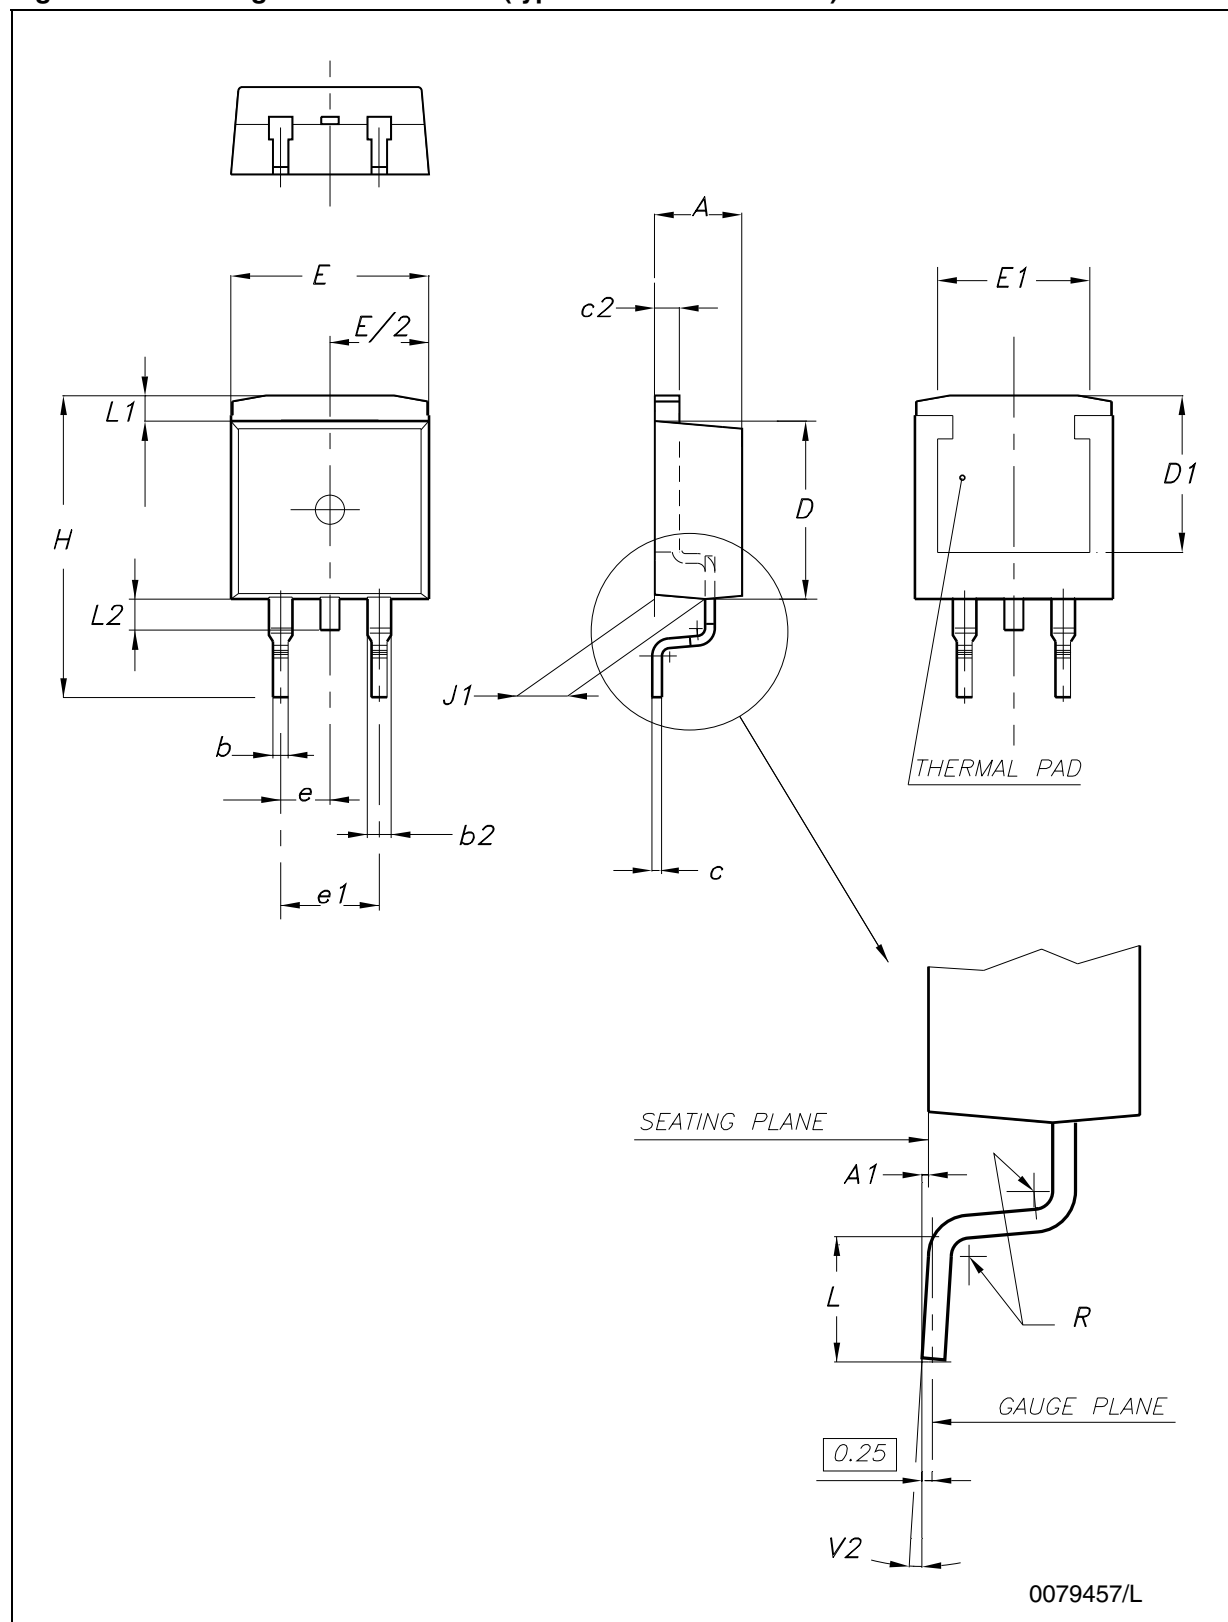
Drawing dimension D<sup>2</sup>PAK (type WOOSEOK-Subcon.)
